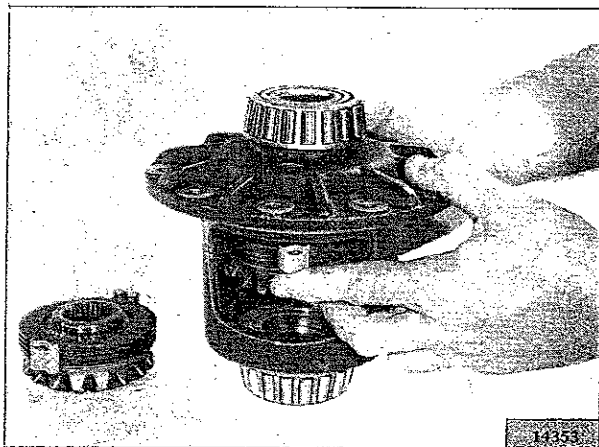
INSTALLING PLATE RETAINER CLIPS
